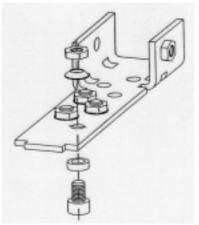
/11 Coding mechanism on the draw-out circuit-breaker
